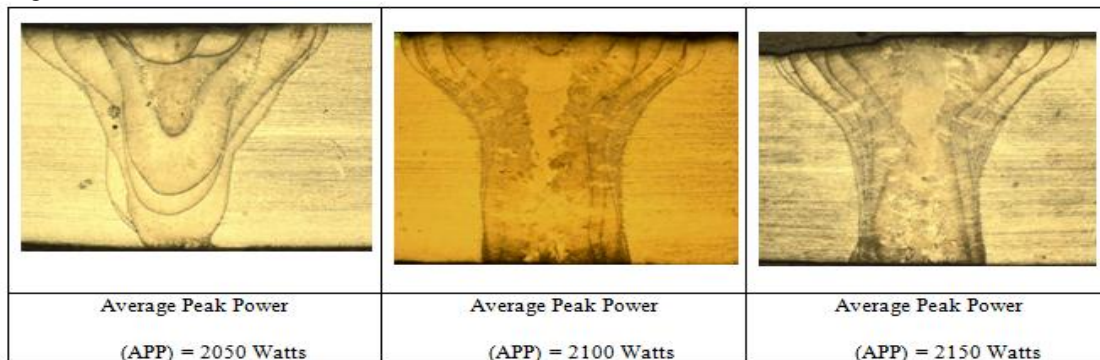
Full penetration welds achieved using optimized parameters for AISI 316L stainless steel joints
